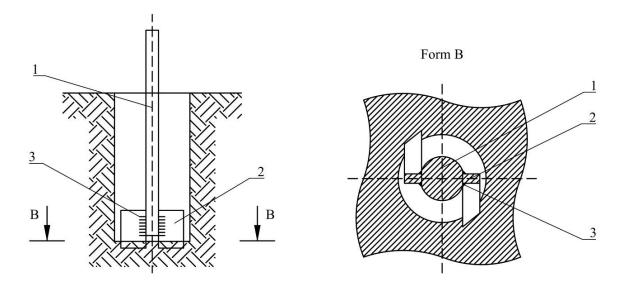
Dipping the equipment into the Soil 1 - barrel; 2 - pointed plates; 3 - welded joints
